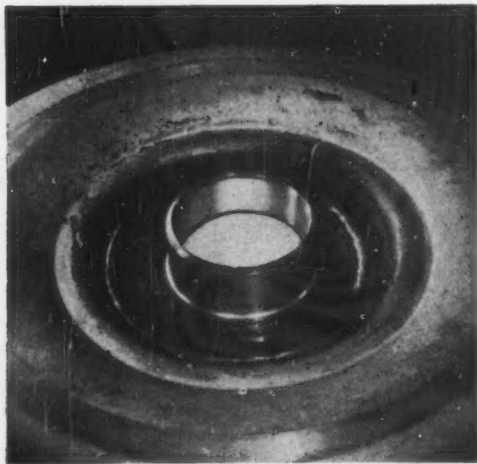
Both the Hub Bore and Periphery on this Torque-converter Assembly are Roller Burnished with the Tools Shown in Figs. 1 and 2, Mounted on Standard Vertical Drilling Machines
